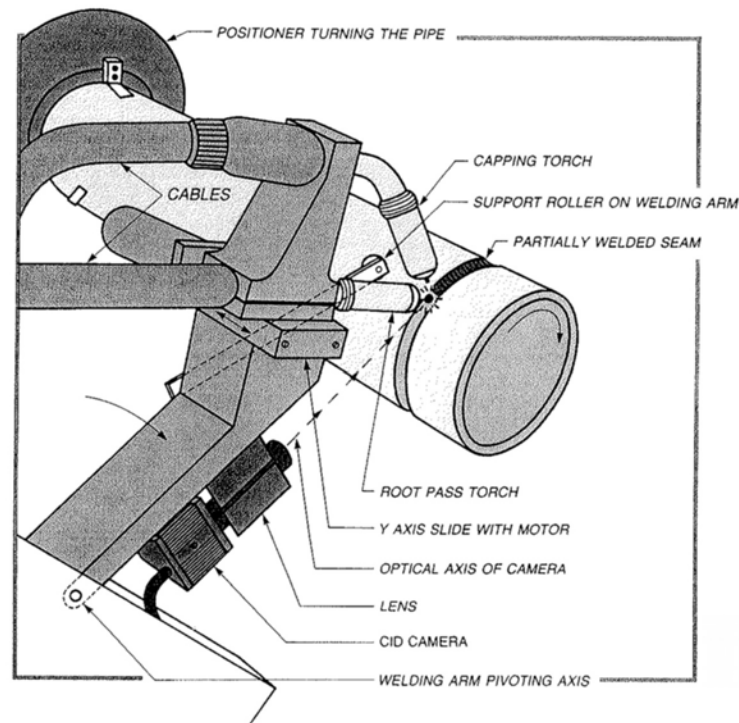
Schematic of Rotoweld 2000 Computerized System Designed for Automation of a GMA Pipe Welding System Developed for Twin-Wire GMAW for Open Root Pipe Butt Welds for 1G Welding
